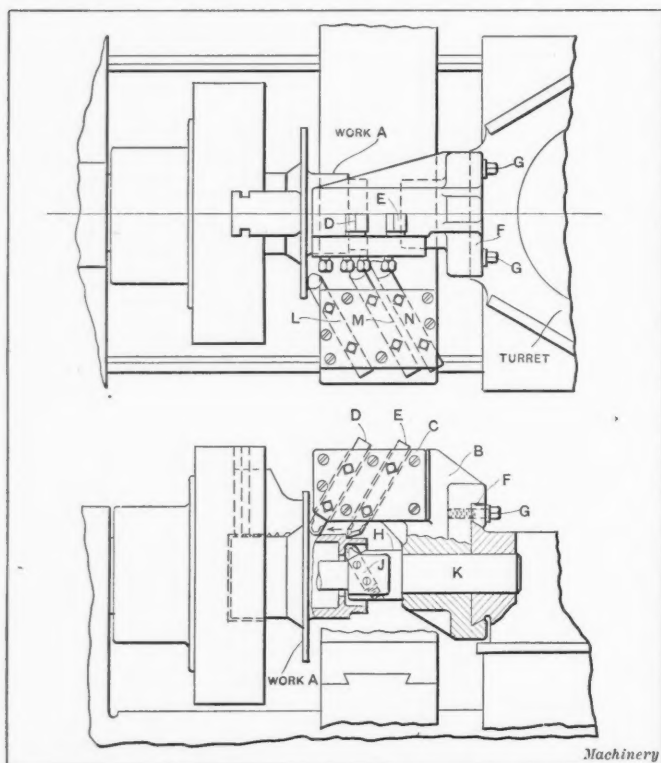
Multiple Tool-holder for machining Automobile Hubs
